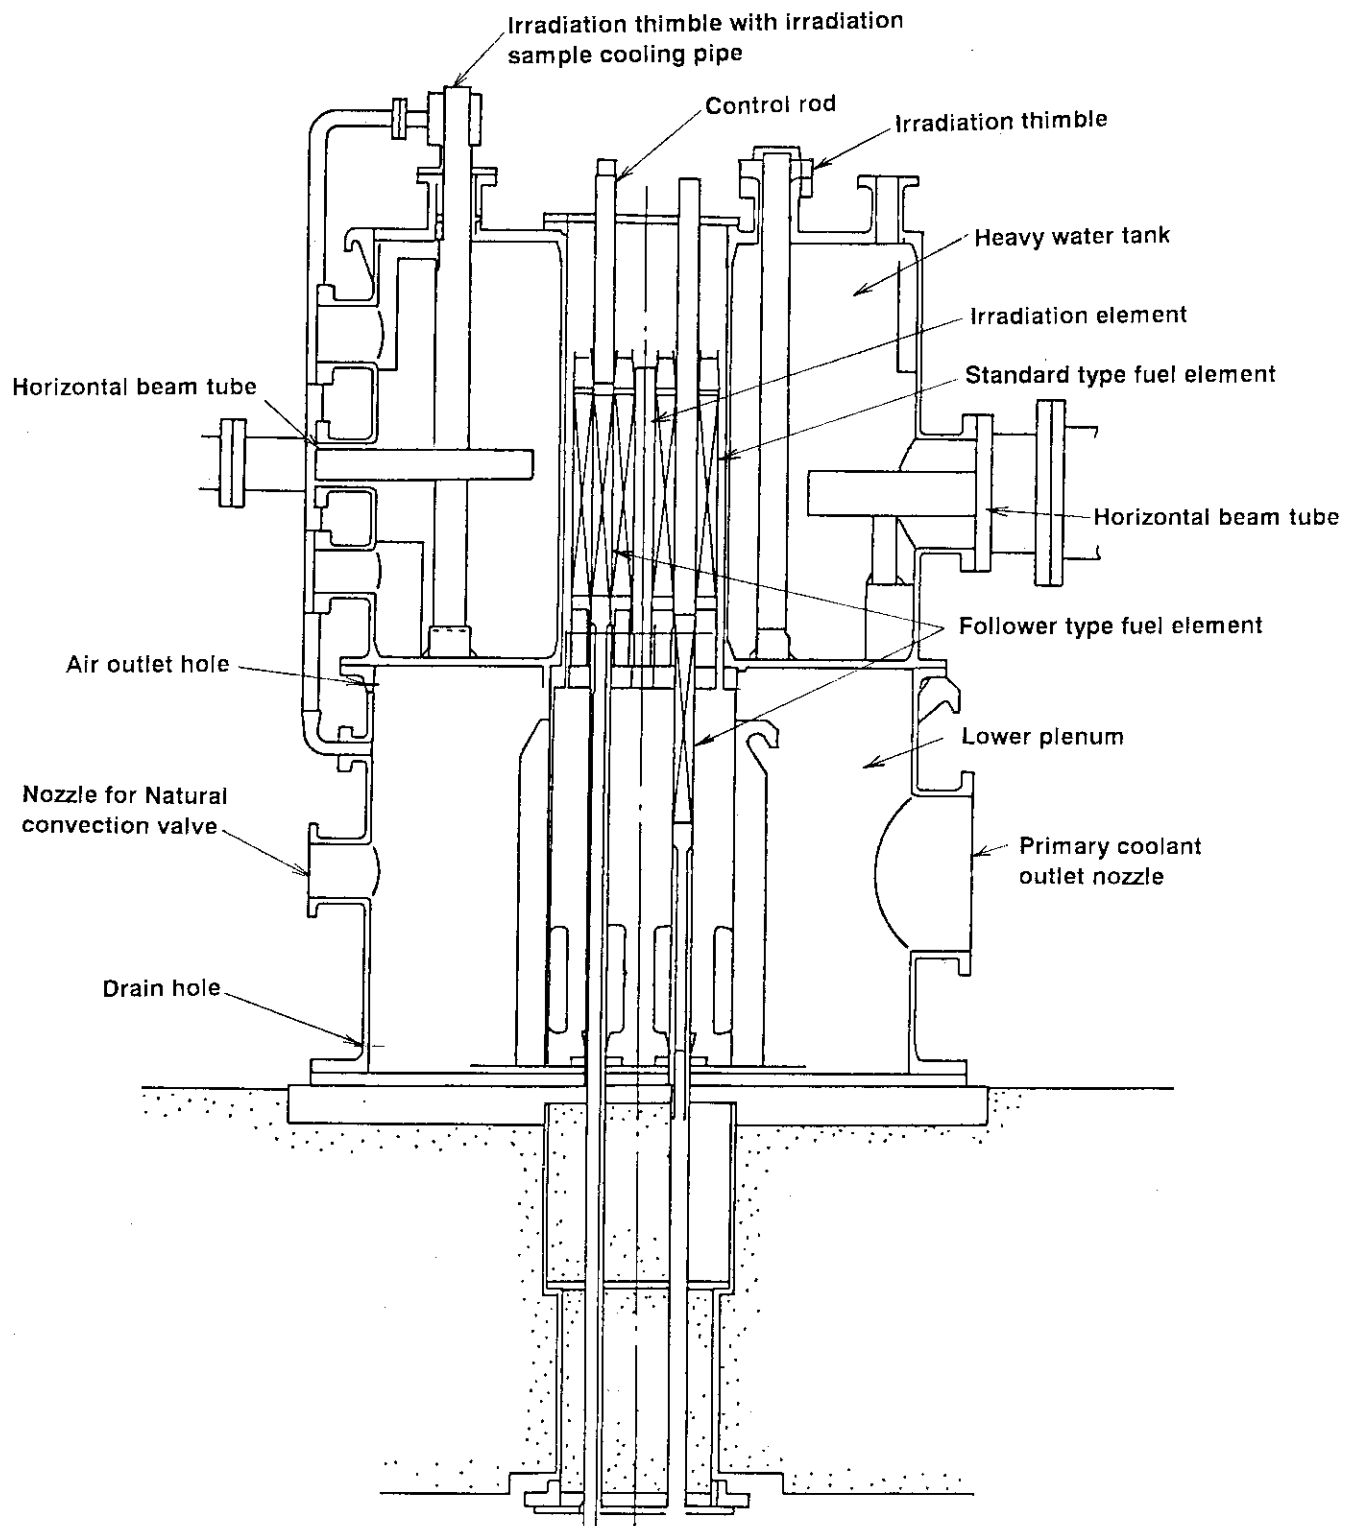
Vertical cross-sectional view of JRR-3 silicide core
